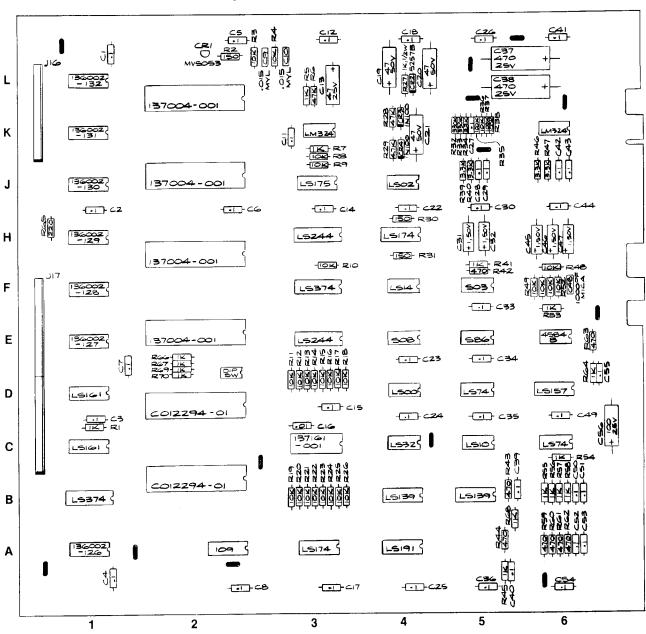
Tempest[™] Auxiliary PCB Assembly A037585-01 B
